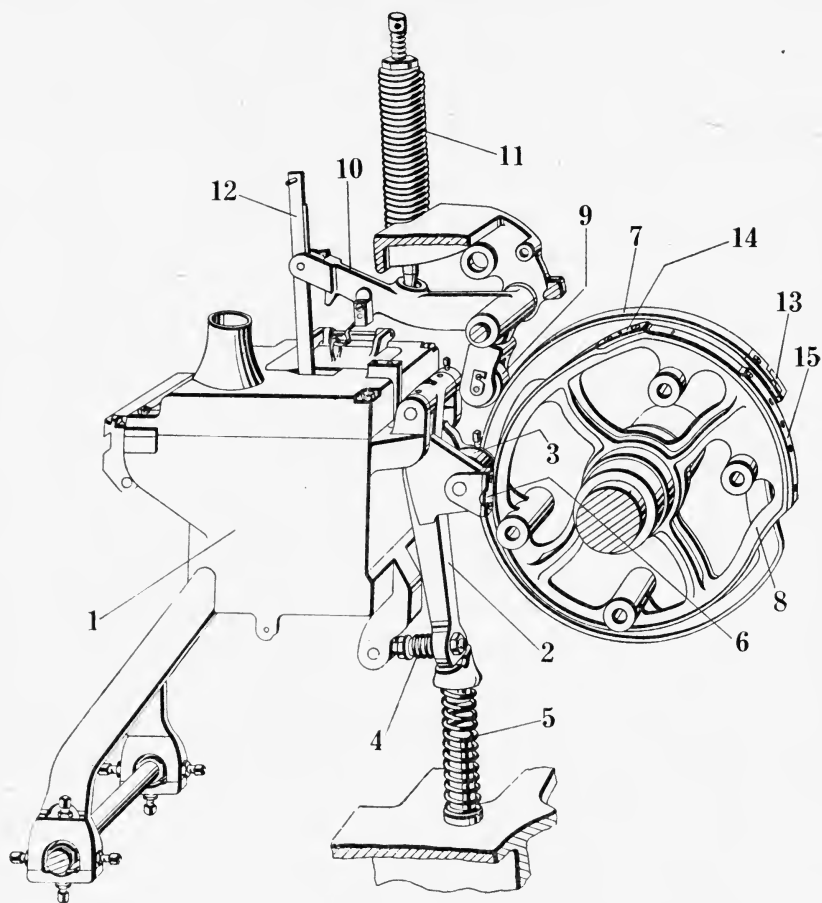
Perspective View of the Pot Cam and the Pot Pump Cam. The two cams are made in one casting. The pot cam 8 moves the pot 1 forward against the mold through its contact with the roller 3 in the pot lever 2. The spring 4 set between the pot 1 and the pot lever 2, provides a yielding lockup pressure of the pot mouthpiece against the mold. As the pot cam 8 revolves to move the pot toward the mold, the short shoe 14 exerts a heavy pressure of the pot mouthpiece, through the mold, against the matrices and spacebands so that all the letters on the slug will be of even height. As the short shoe 14 passes the pot lever roller 3, the pressure of the mouthpiece against the mold is released and the pot recedes from the mold a little in order that the justification levers can drive the spacebands home and complete justification of the matrix line. The long shoe 15 then contacts with the pot lever roller 3 and locks the mouthpiece against the mold while the pot pump plunger descends to cast a slug.
